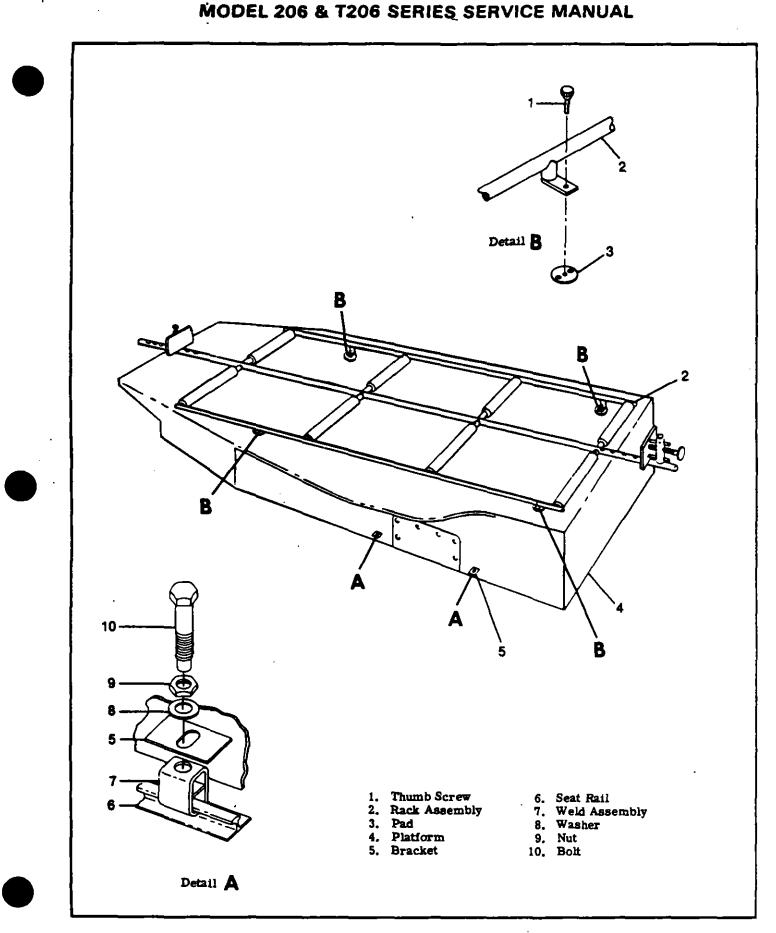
Casket Carrier Installation (Sheet 1 of 2)
